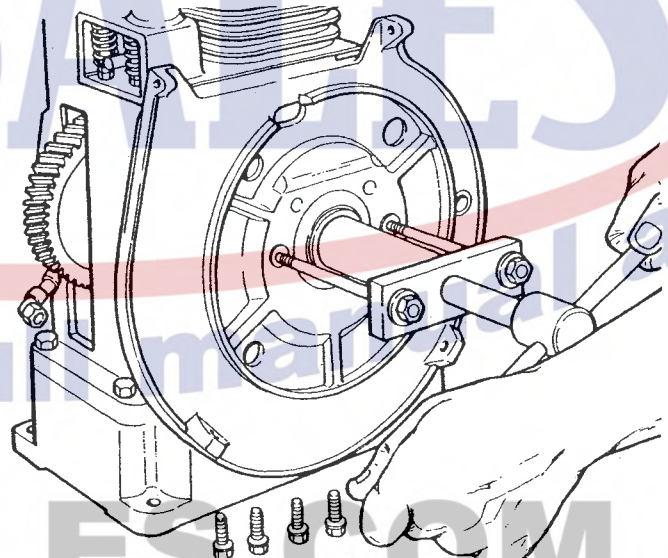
REMOVING BEARING PLATE WITH PULLER
